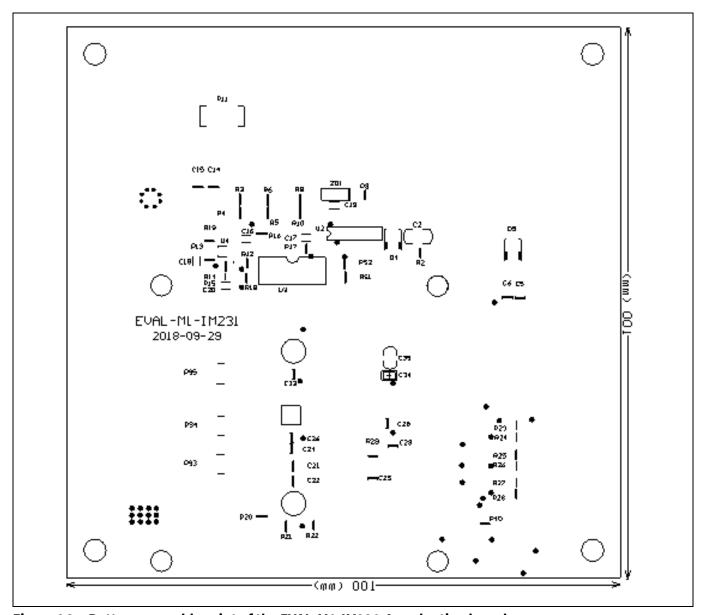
Bottom assembly print of the EVAL-M1-IM231-A evaluation board
